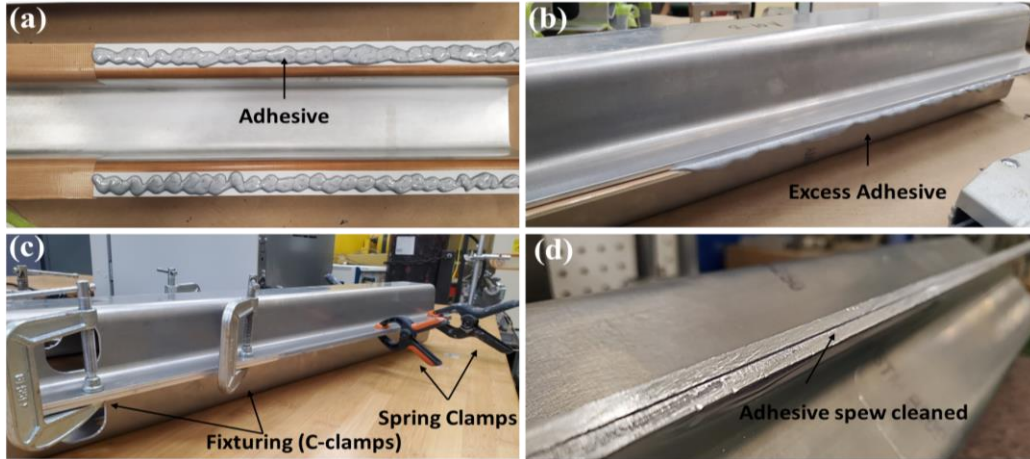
(a) thick continuous bead of adhesive applied to the hat section, (b) mating of hat sections ensuring excess adhesive, (c) fixturing the hat sections using C-clamps and spring clamps, and (d) flange edge after adhesive cleaning.
